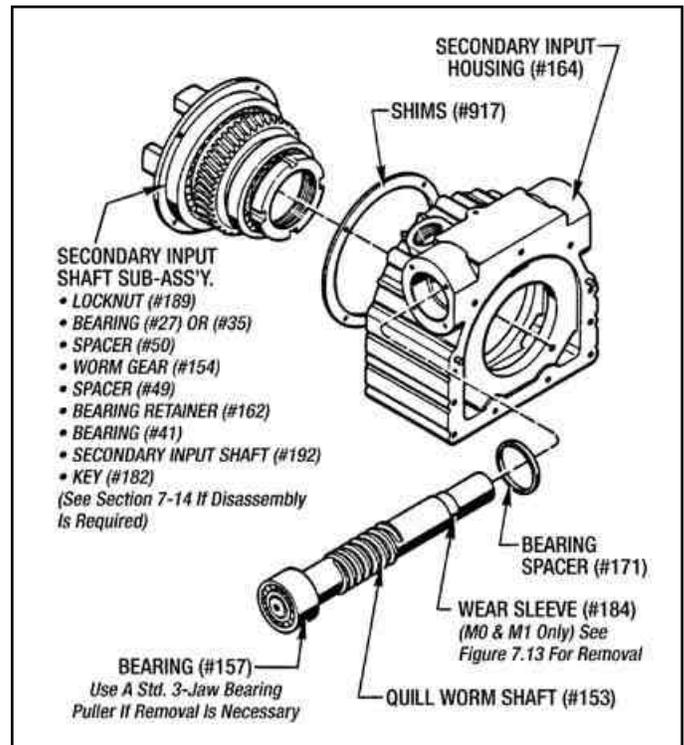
Removing Worm Shaft (#153) And The Secondary Input Shaft Sub-Assembly
